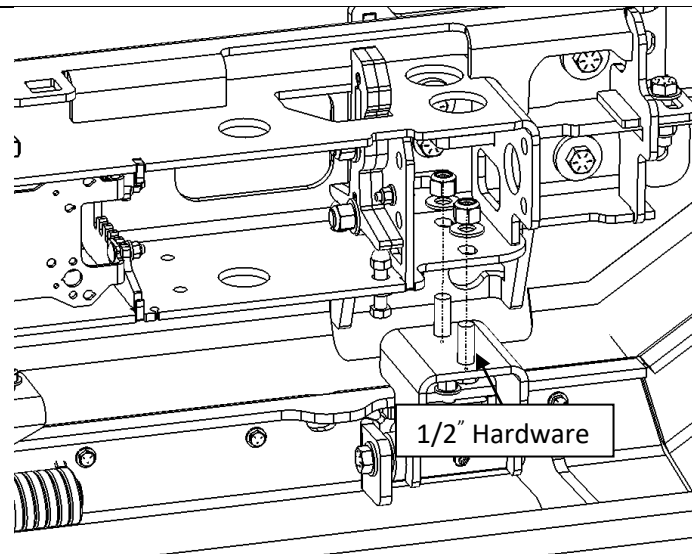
Bracket and Truck guard Disassembly (Driver Side Shown)
